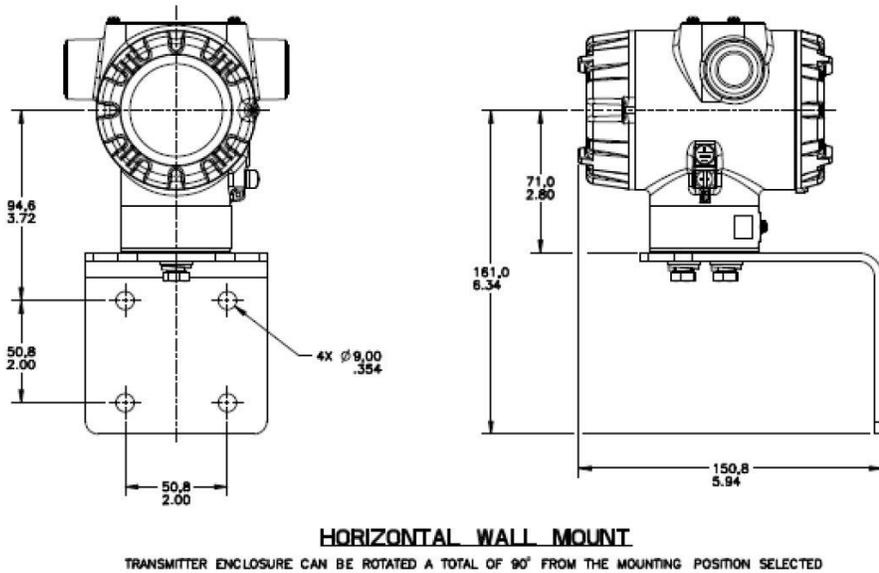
STT850 No-Adapter Horizontal Wall Mounting
